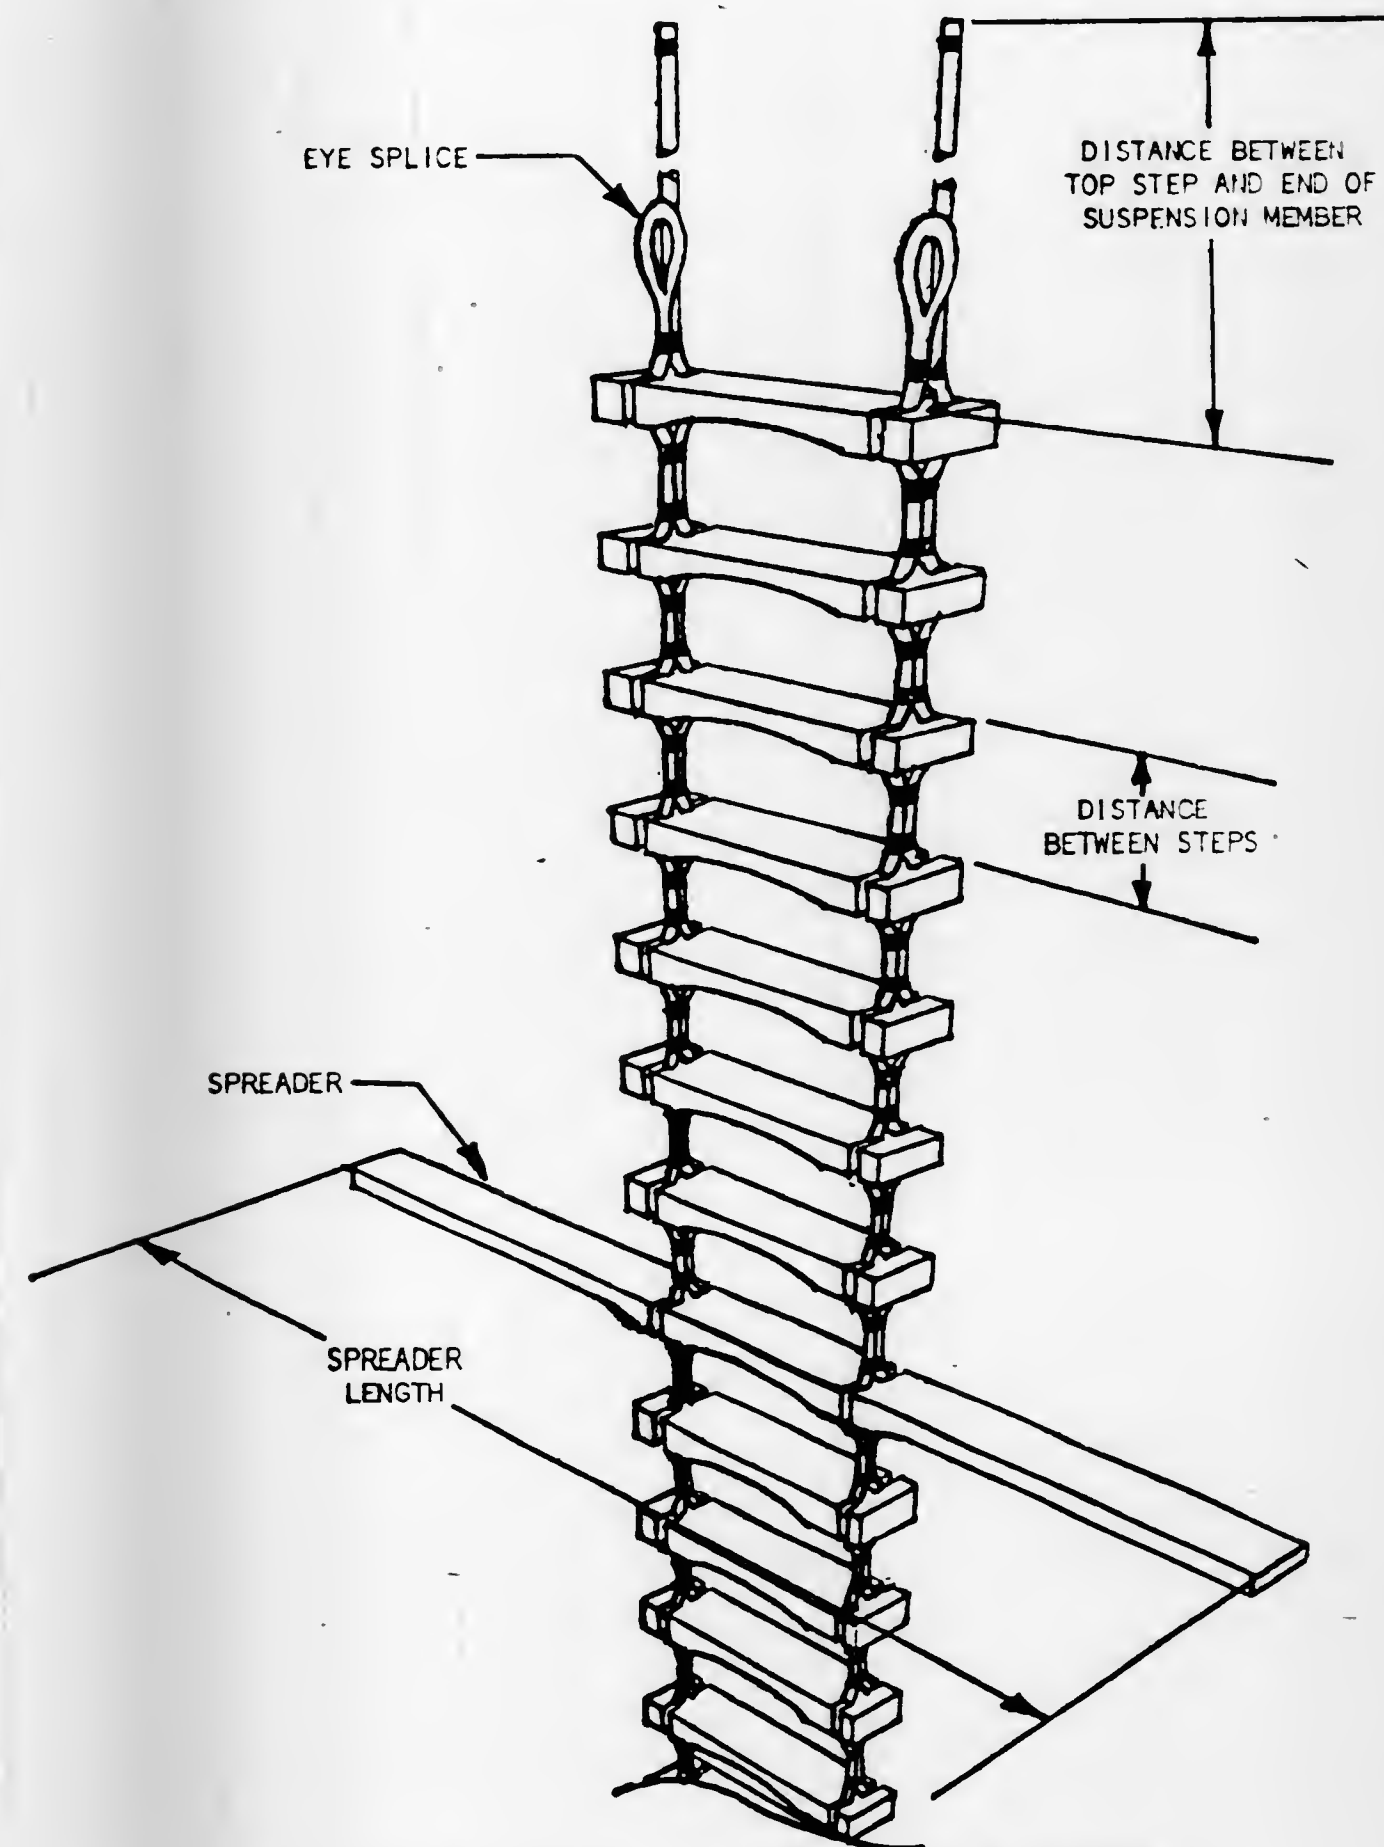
(a)(1) TYPICAL PILOT LADDER ARRANGEMENT
